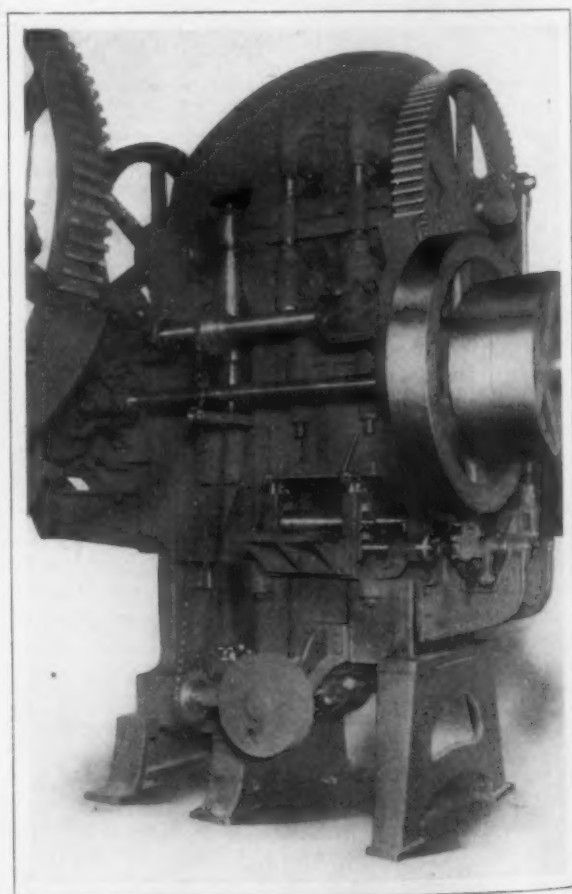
Rear View of Automatic Combination Drawing Press Showing Drive for Dial
